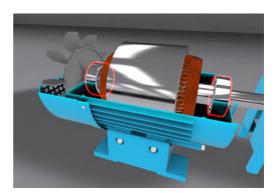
3D Model of inner parts of a Motor Pump [18].
